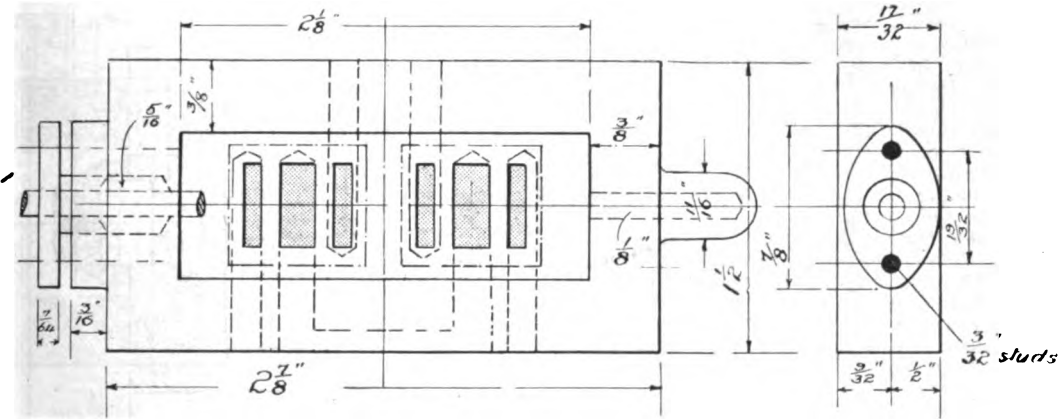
FULL-SIZE DETAIL OF VALVE CHEST, SHOWING PORTS AND STEAM PASSAGE.
